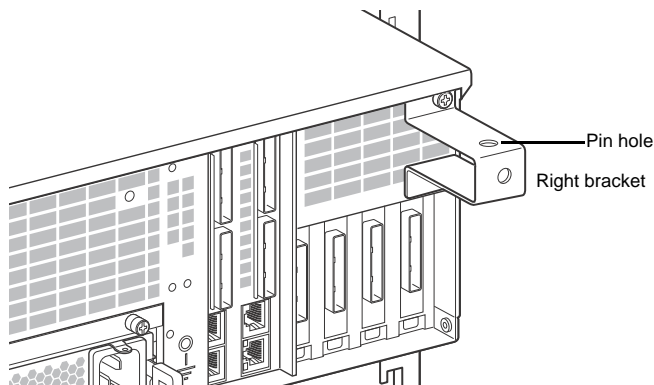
Attaching the Right Chassis Mounting Bracket
